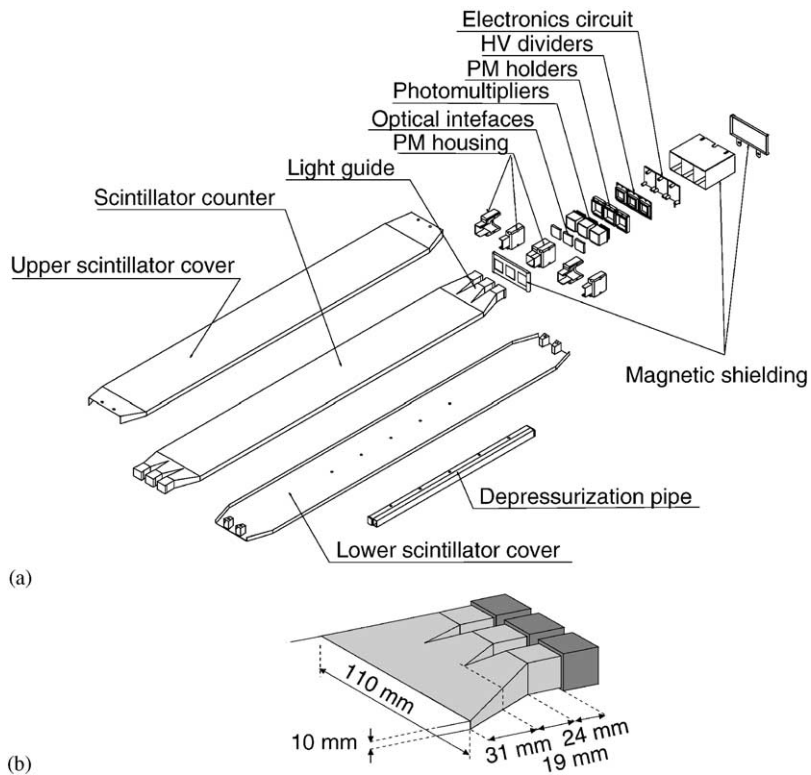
(a) View of one scintillator module assembly; (b) design of the light guide.
